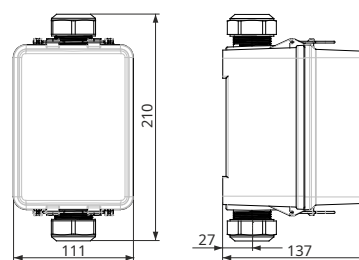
Dimensioned drawing and drilling diagram of the DFU 911
